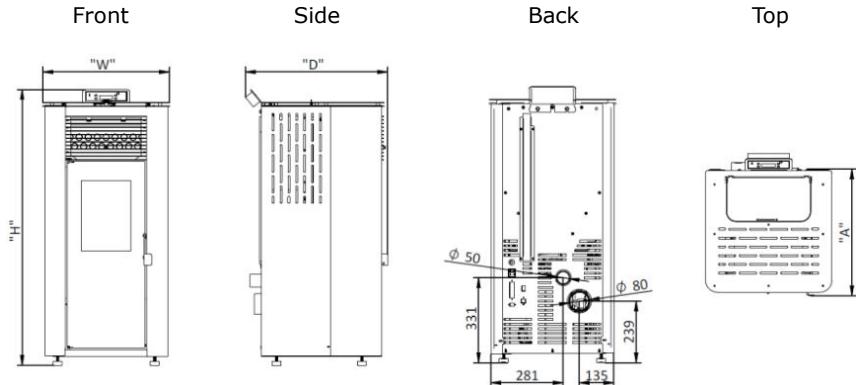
B – Dimensions of the free-standing pellet fire unit K100 (example model Fuji)
